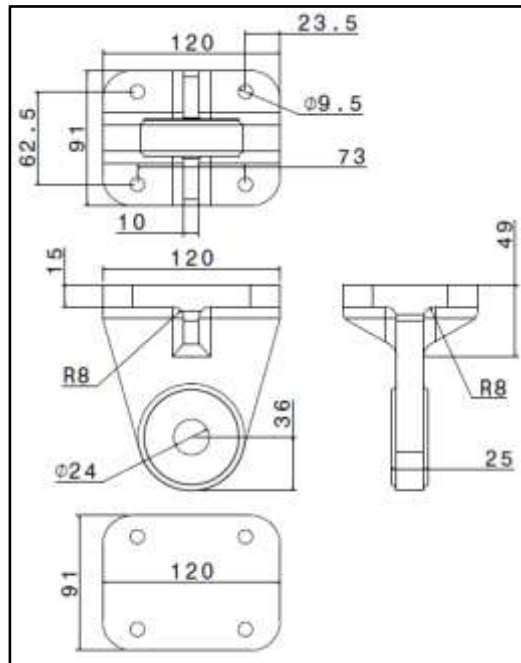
Orthographic drawing of the shear fitting with all the designed dimensions
